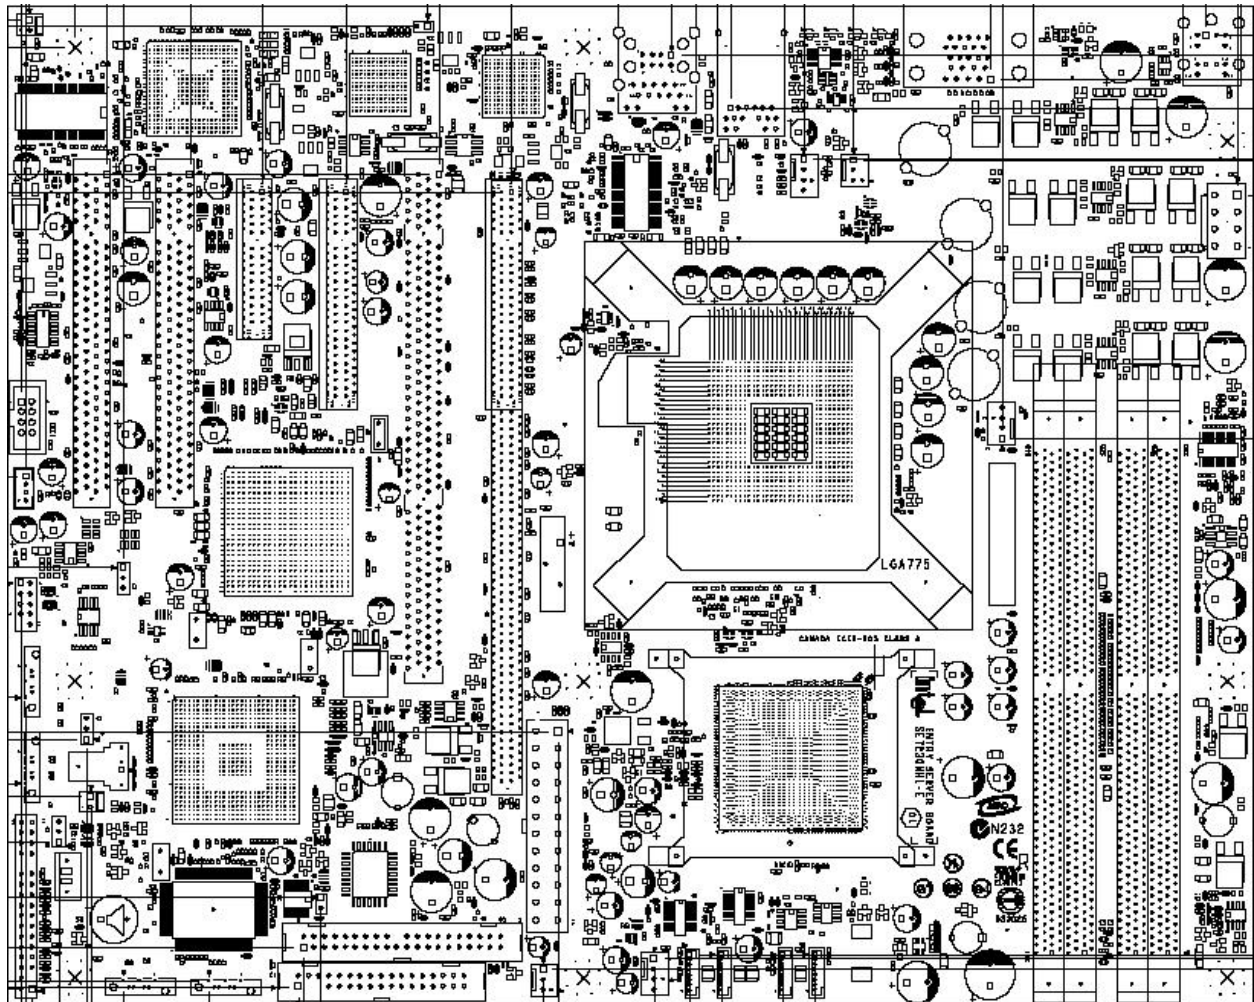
Intel® Server Board S3000AH Mechanical Drawing
